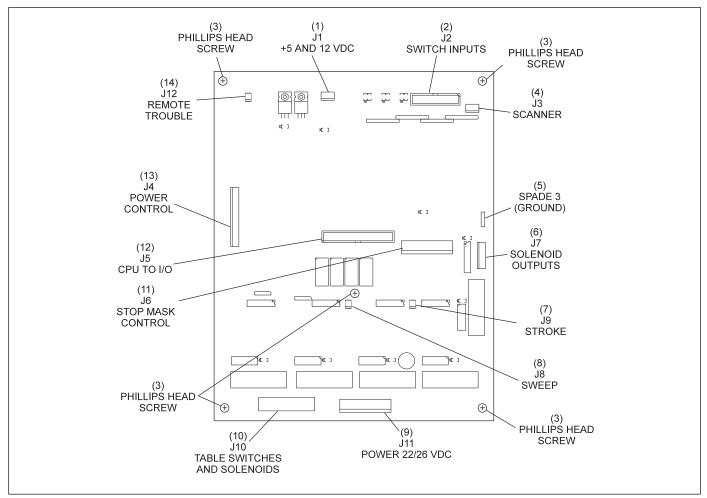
Consolidated Low Voltage Box I/O PCB Removal.
